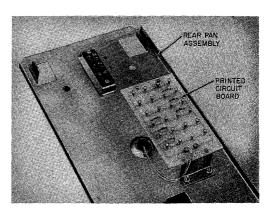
Printed Circuit Board (Part of D-180941 Kit of Parts) Mounted to Rear Pan Assembly of 10A Coinless Telephone Set
